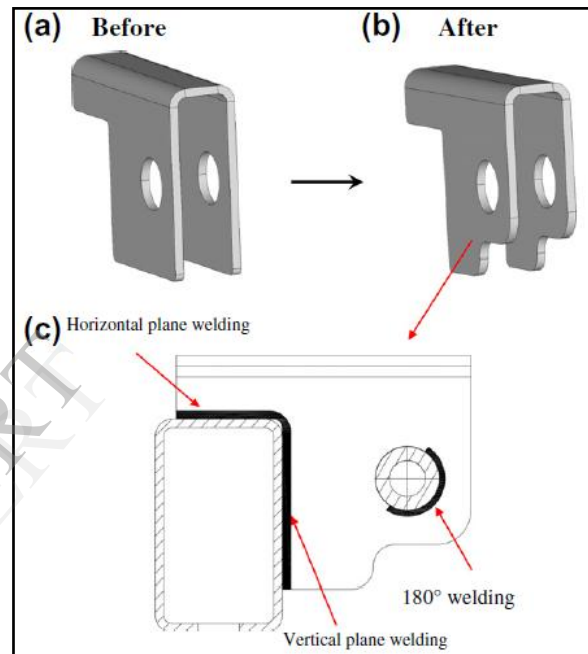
(a) Old 'L' type design of the bracket (b) New 'L' type design with 'L' relief at the bottom (c) Weld area is increased by 180° in the new design [3].
